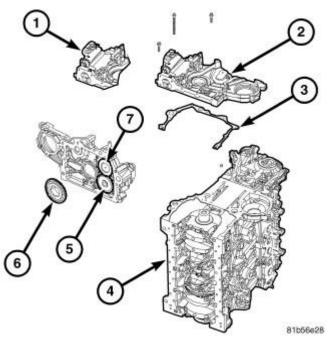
VACUUM PUMP AND OIL PUMP Courtesy of CHRYSLER LLC
